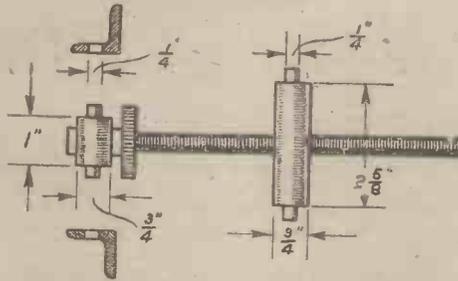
Details of the screwed adjusting bar for the tilting frame
